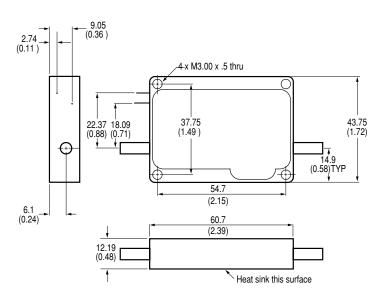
Agilent 87400A outline drawing. Dimensions in millimeters and (inches).
